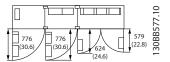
Space in front of IP21/IP54 enclosure type, frame size F13
